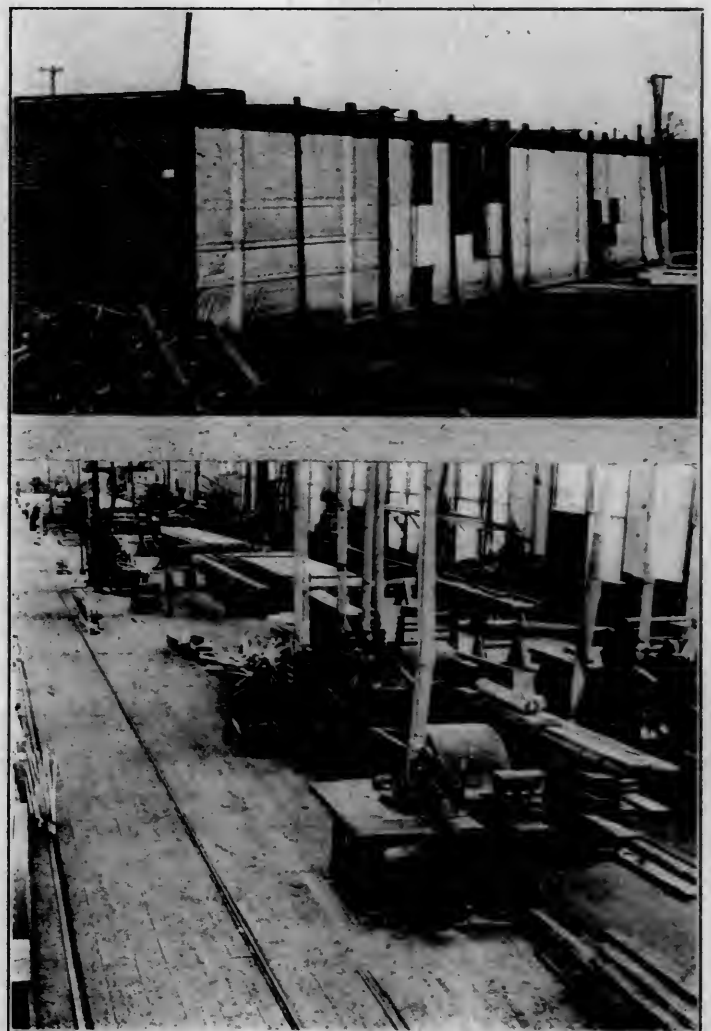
FREIGHT CAR DEPARTMENT DRY KILN.
